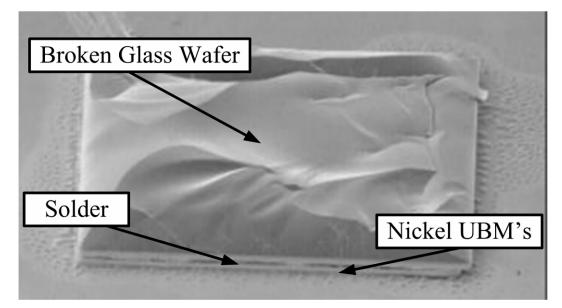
Remnants of the wafer bond strength test. The solder bond was stronger than the fracture strength of the glass wafer, so the bond failed by fracturing the glass wafer instead of pulling the solder bond apart.
